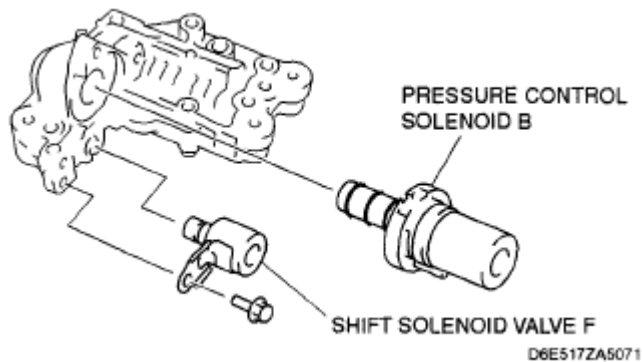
View Of Pressure Control Solenoid B And Shift Solenoid F
